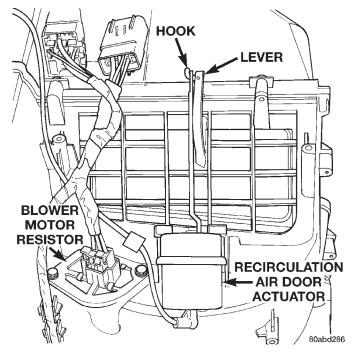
Recirculation Air Door Vacuum Actuator Remove/Install
